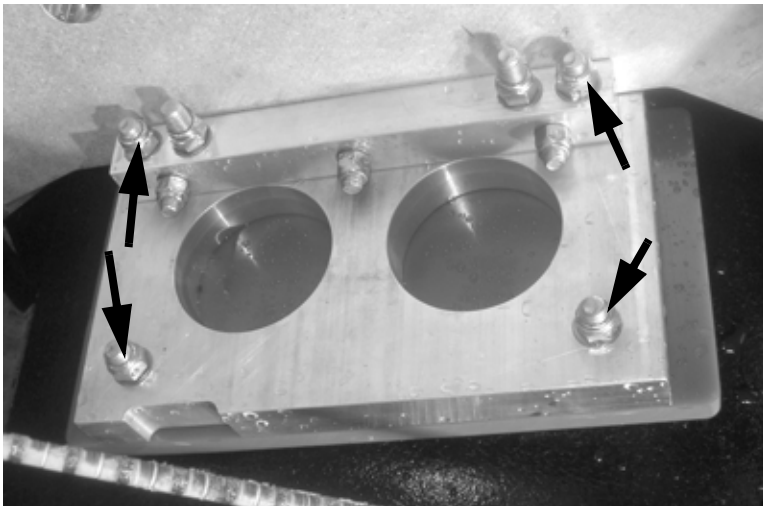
The four screws indicated hold the shoe to the machine frame.
